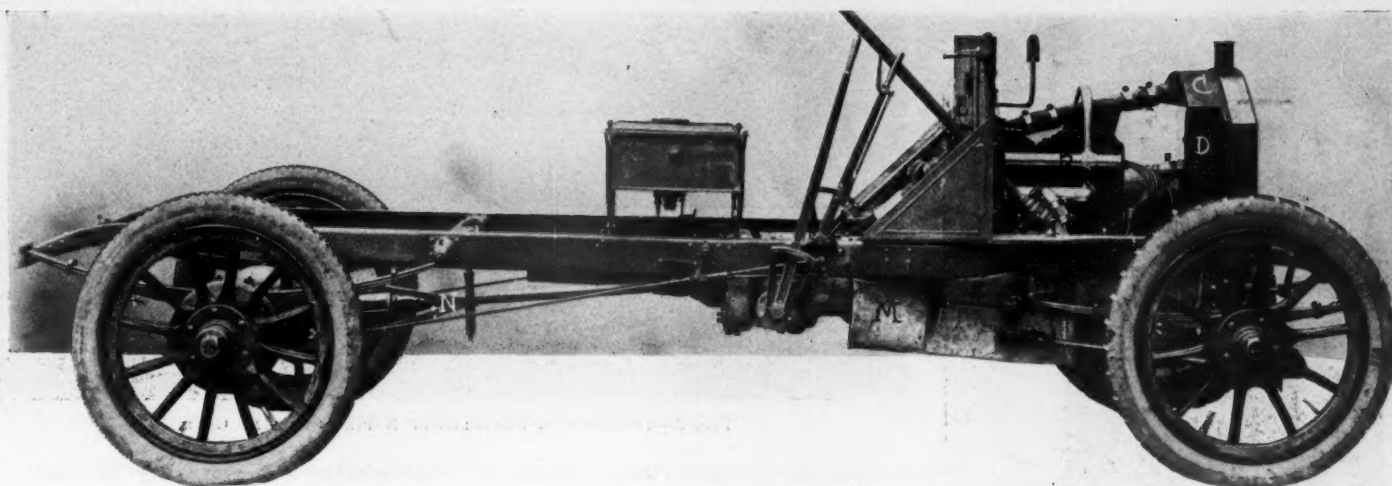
CHASSIS OF THE 15-HORSEPOWER, FOUR-CYLINDER MODEL ENGLISH NAPIER
